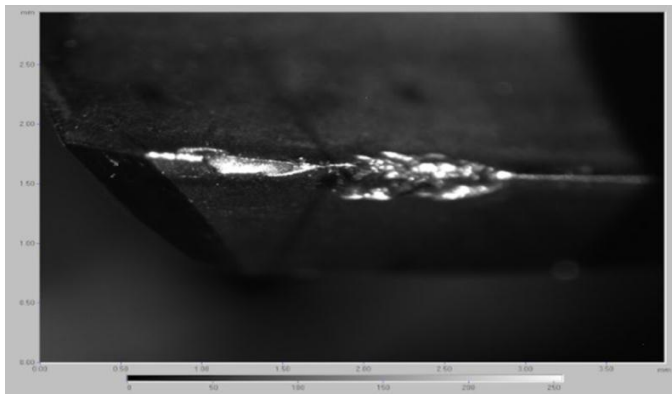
The tool cutting edge chipping preview using MahrSurf TS50 non-contact surface microscope
